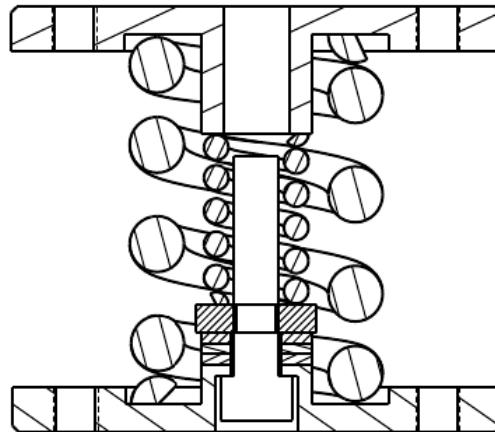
Technical drawing of the spring dummy designed for test rig analysis.
